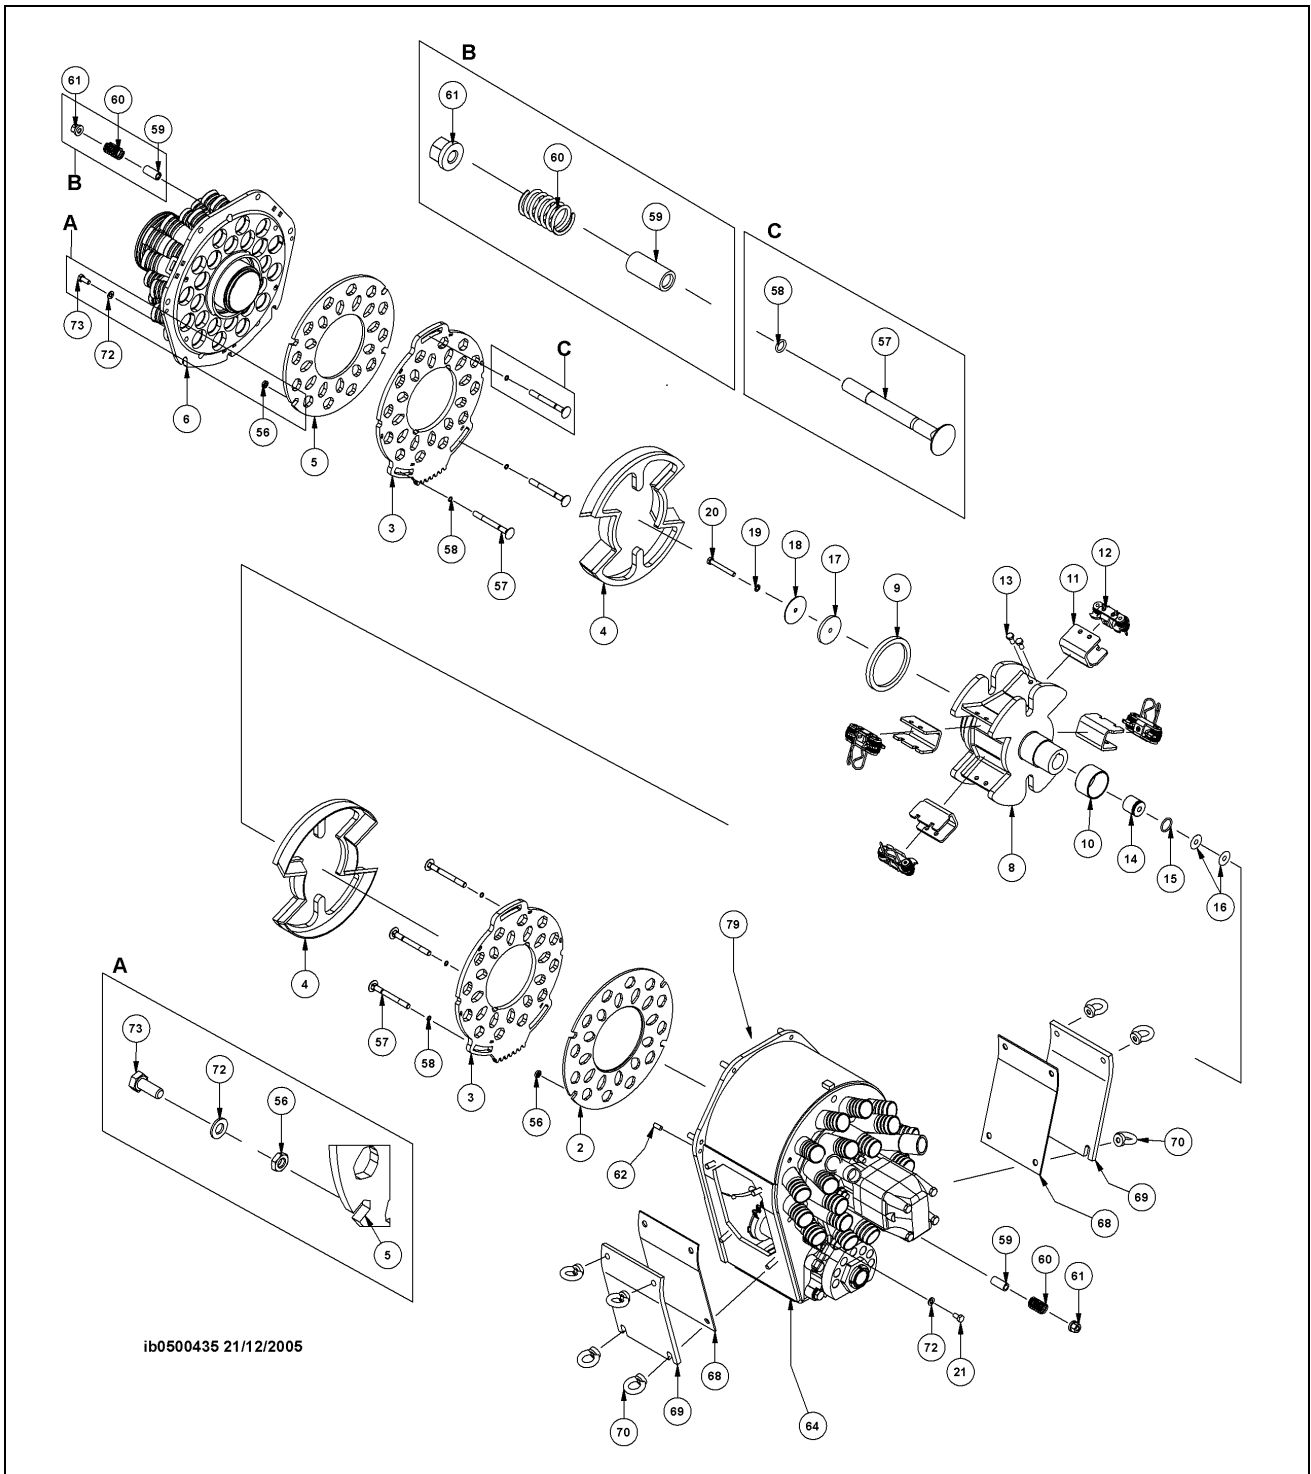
Exploded view of ExaCut ECV30-40 / 48-40 wear part replacement
